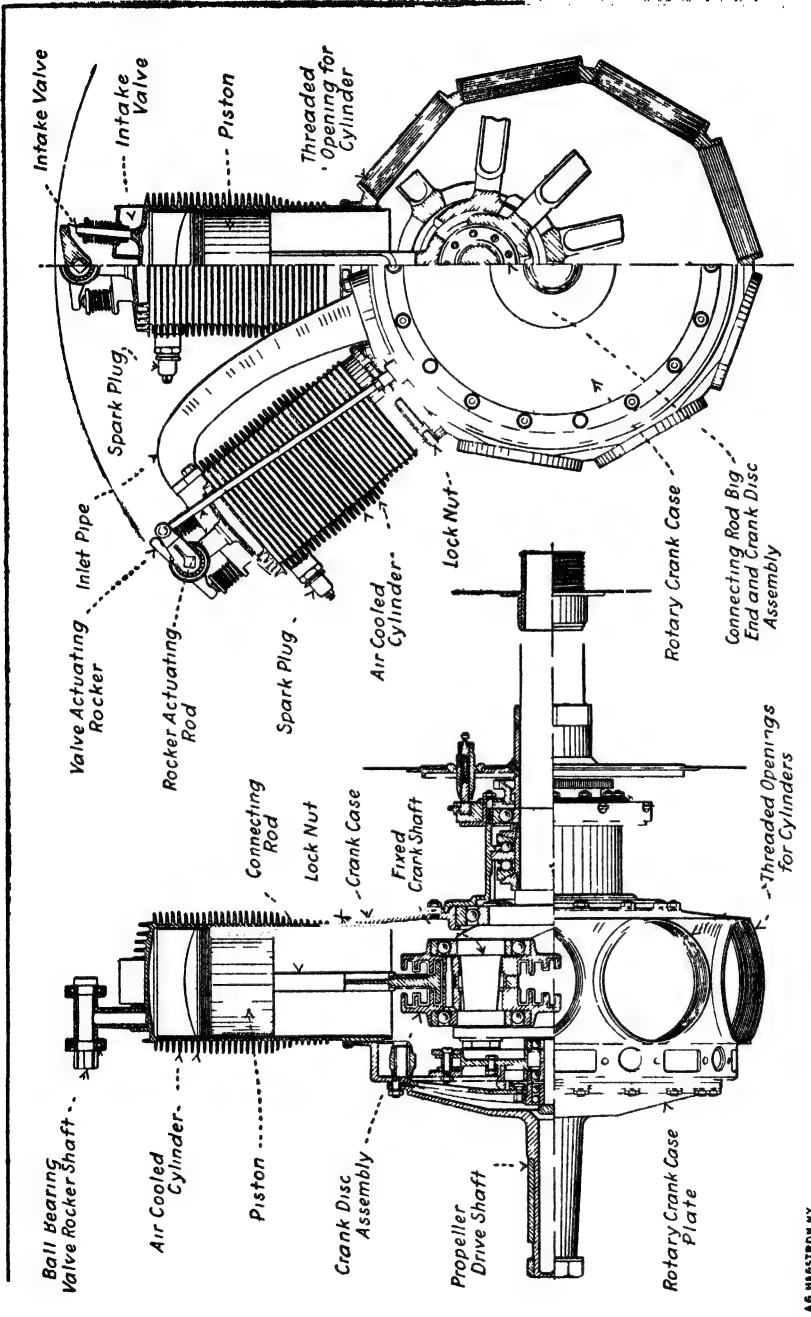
Part Sectional Views of the LeRhône Rotary Cylinder Engine, Showing Method of Cylinder Retention, Valve Operation, and Novel Crankdisc and Connecting Rod Big End Assembly.
